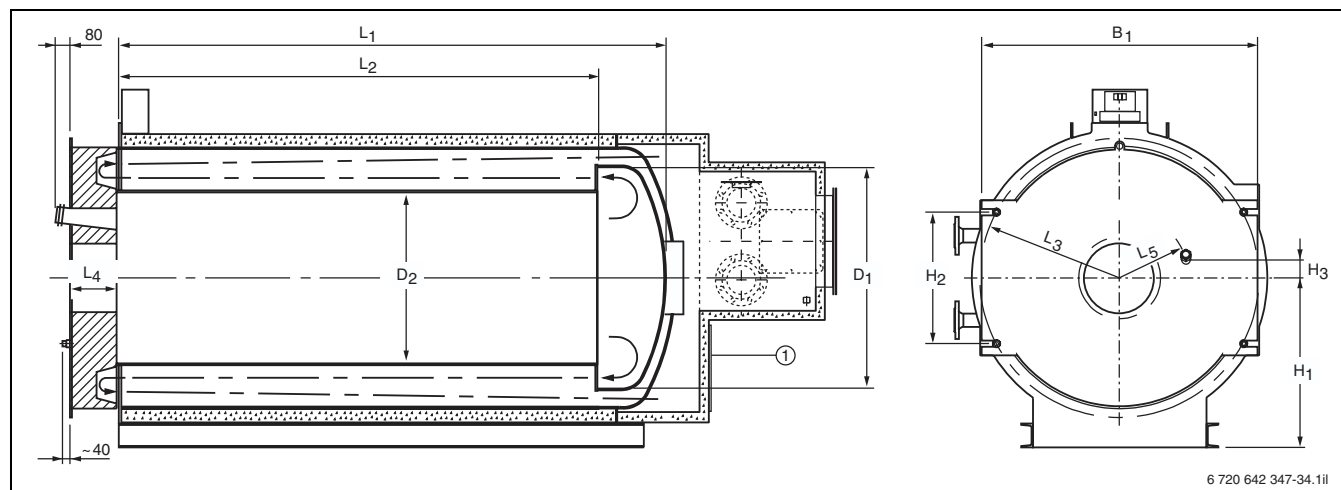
Combustion chamber dimensions Logano plus SB825L, boiler sizes 6500 to 19200 (dim. in mm)
